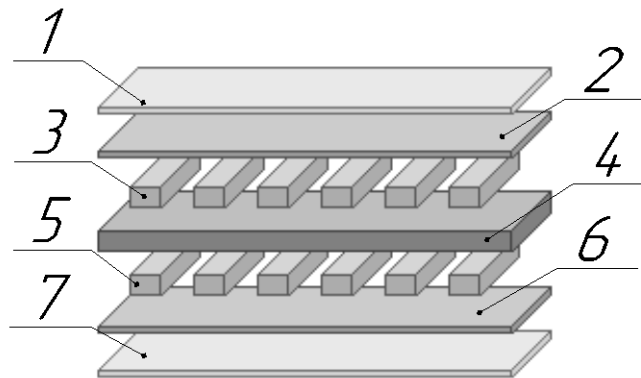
The layered 3D model of the PCB: 1 - Top Overlay, 2 - Top Solder, 3 - Top Layer, 4 - Dielectric, 5 - Bottom Layer, 6 - Bottom Solder, 7 - Bottom Overlay.
